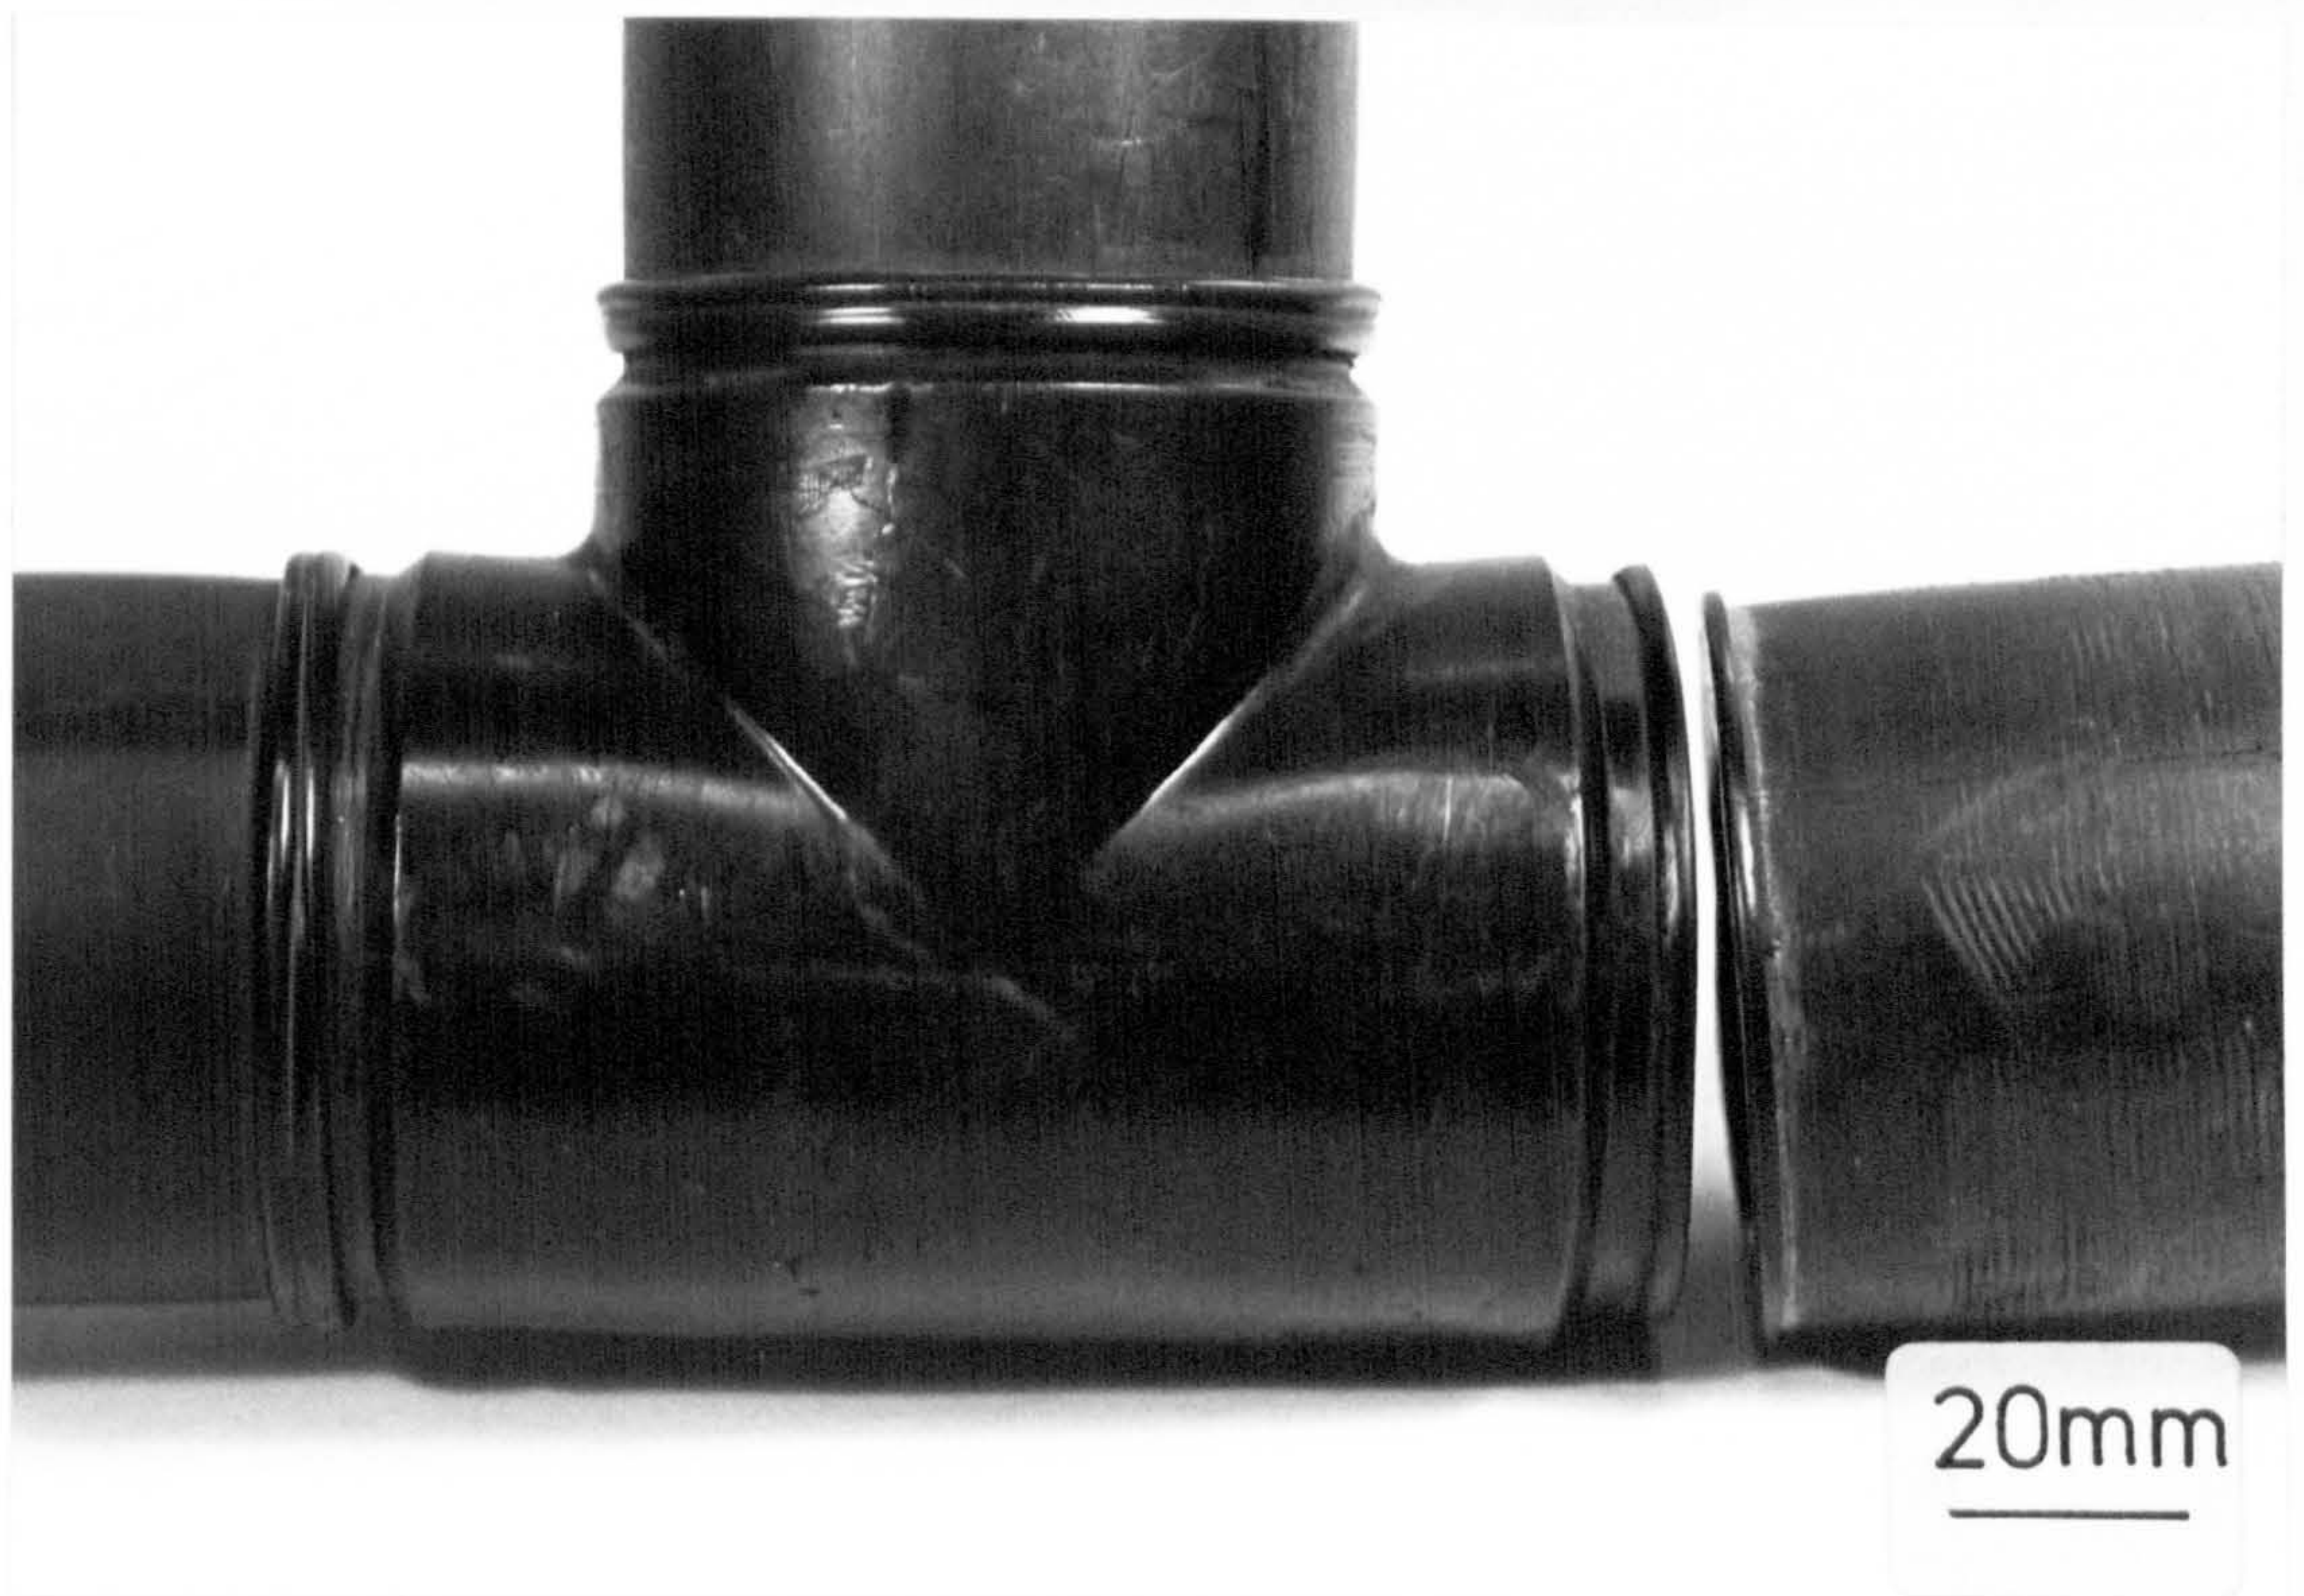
Circumferential butt-weld failure (T2 type 2) in an HDPE 1 pipe + batch A 90° equal tee system. (This mode of failure was the only type of butt-weld fracture observed in MDPE 1 bend or tee systems.)
